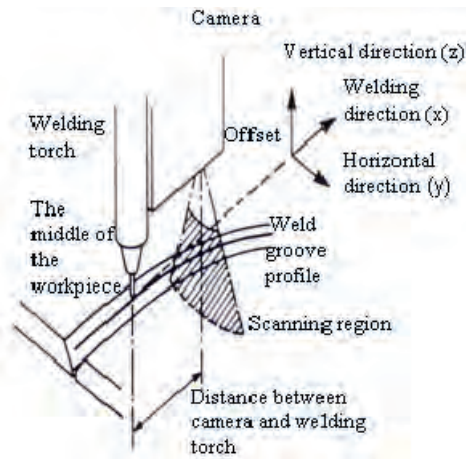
Working geometry and camera positioning in “look-ahead” configuration (tandem welding) [5].
